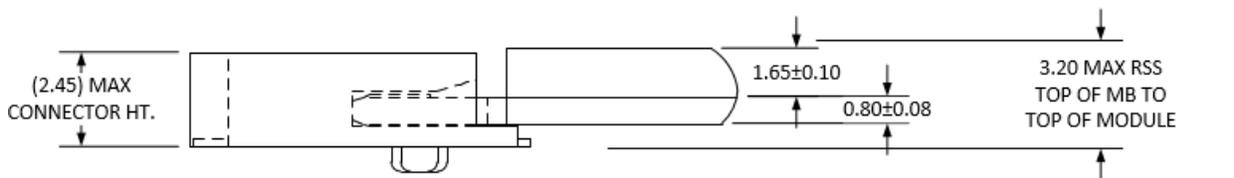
H2.5-S4- Stack-up Top Mount Single-sided Add-in Card for 1.75 Maximum Top-side Component Height and with Higher Clearance above Motherboard
